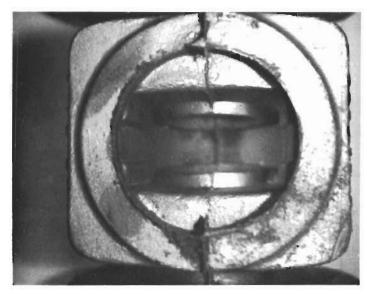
Cored Section of Two Inch Gate Valve Obtained at Oremet
